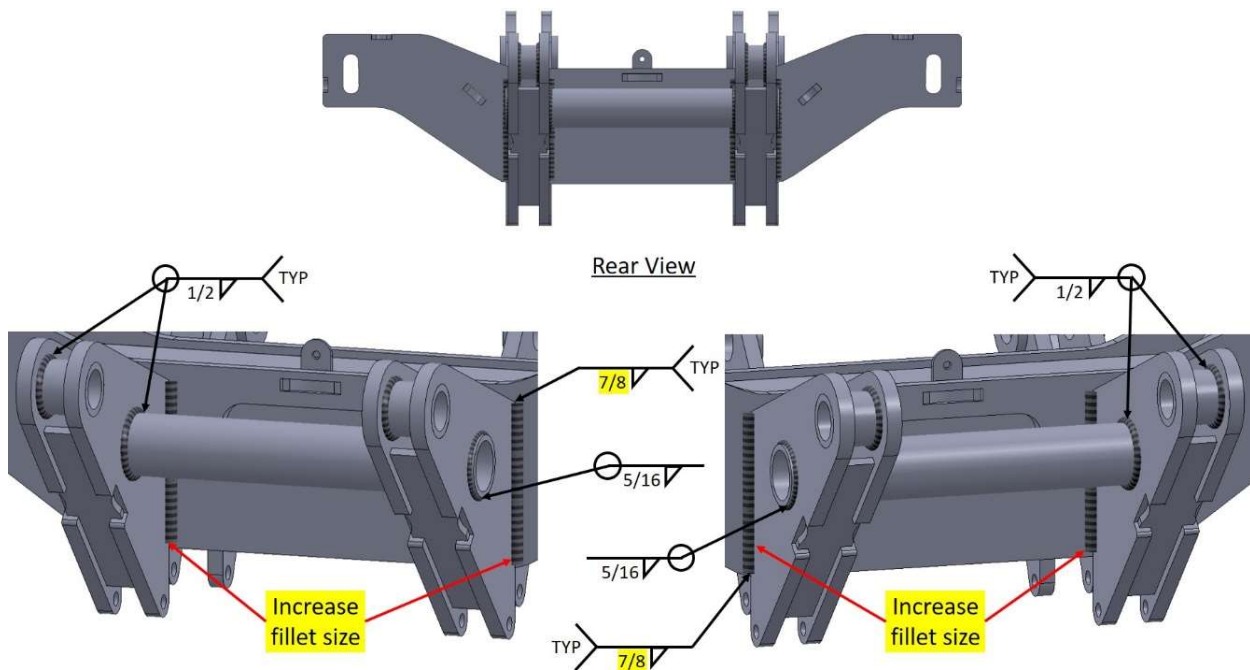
Weld Inspection & Specification, Rear View
